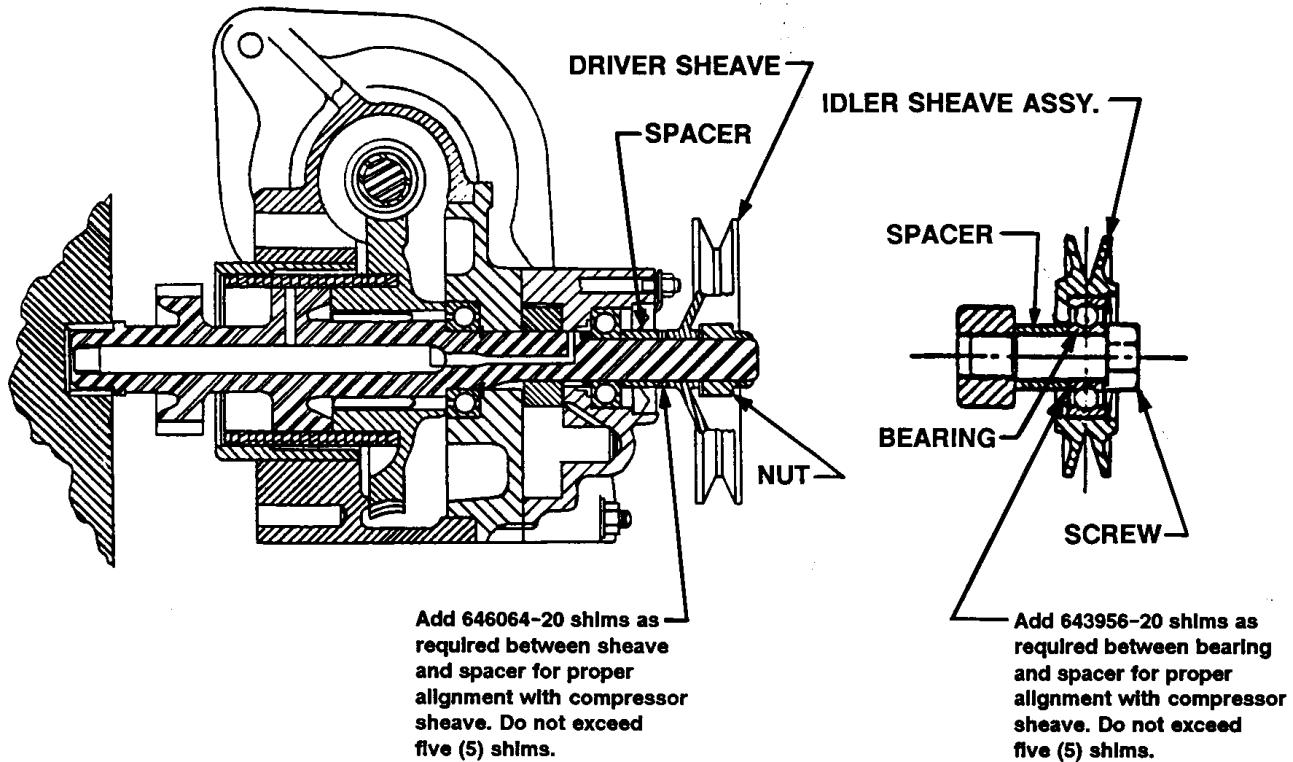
CHECKING SHEAVE ALIGNMENT
